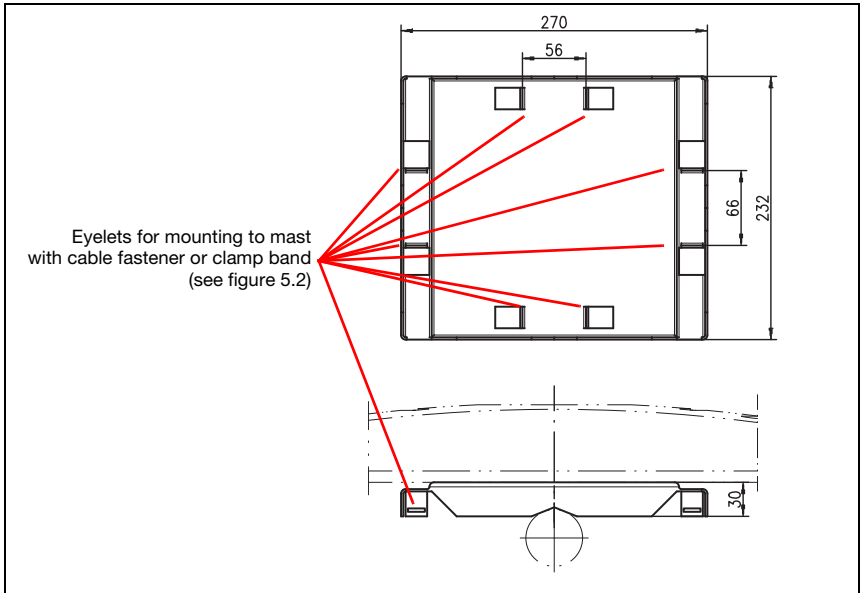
Dimensioned drawing of the RFU 81 SL 100-EU integrated mast mount
